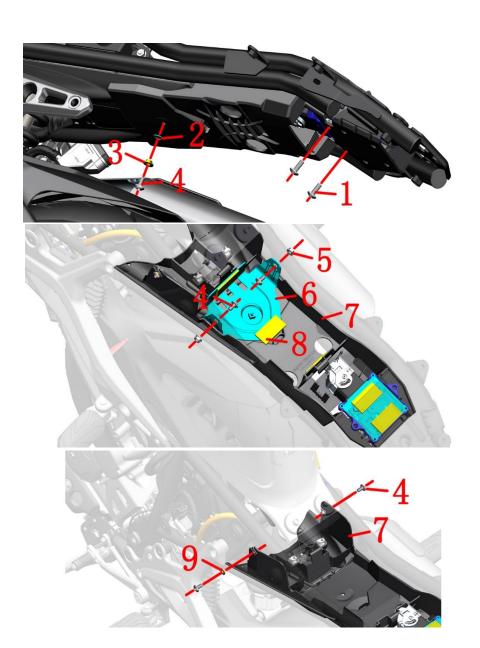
REAR COVER COMPONENT		Electric component box lid component 1	CHK	40)
